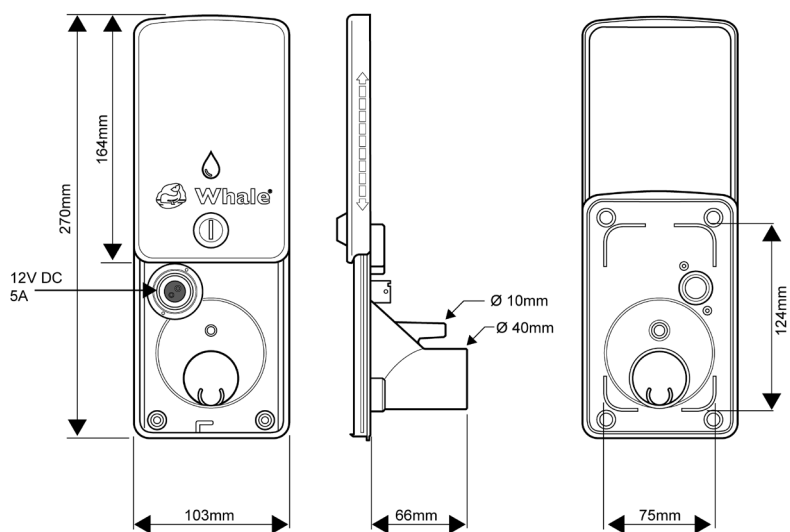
Onboard Tank Fill + 12V Socket Dimensional Drawings
